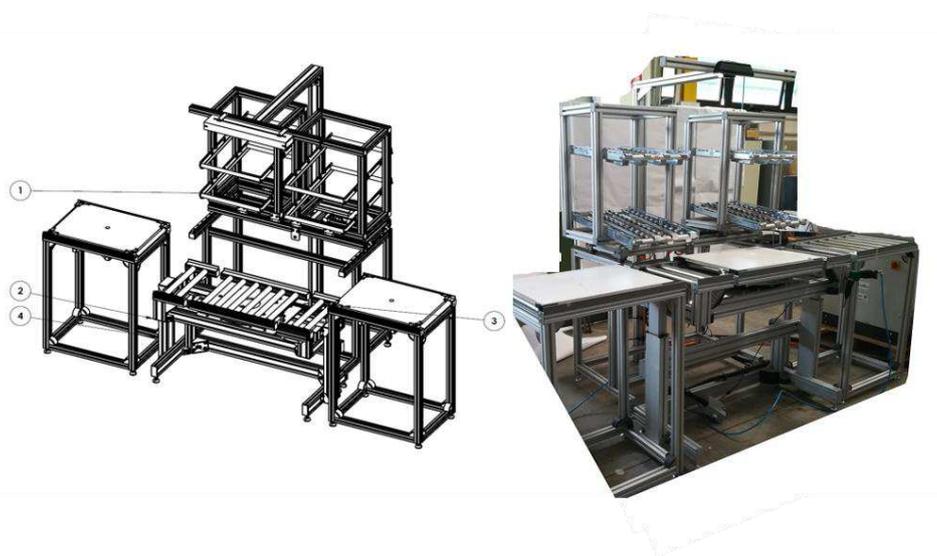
Components of the prototype: 1. Modules for the storage of the assembly parts and components; 2. Extendable supports of the main roller conveyor; 3. Lateral roller conveyor; 4. Main roller conveyor
